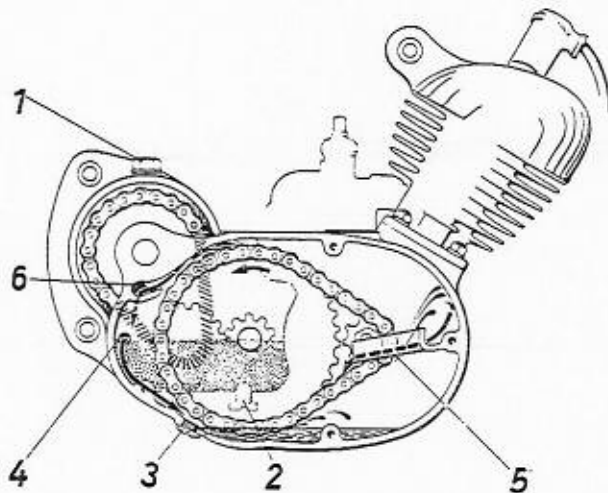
Oil Circulation in Clutch Chamber and Gearbox
